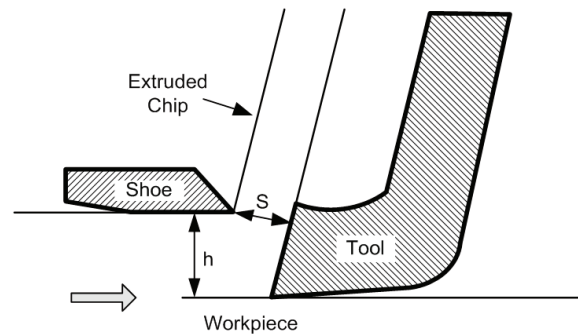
Extrusion-cutting produces a geometrically defined cutting process. Symbols refer to the Nomenclature [8].
